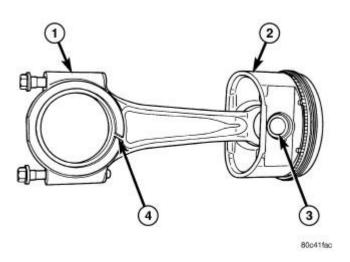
Identifying Piston, Pin & Connecting Rod Courtesy of CHRYSLER LLC
